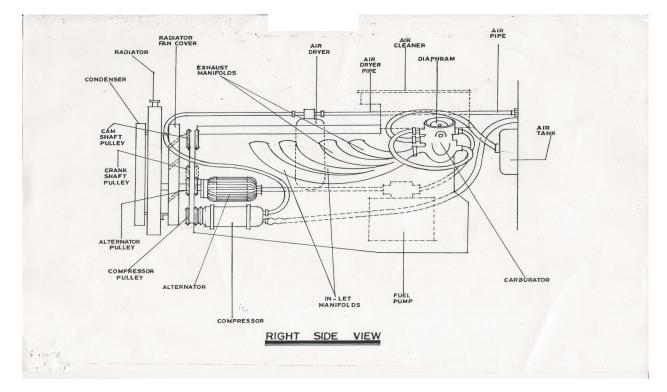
Fuel Economizer Mechanism Using Pressurized Air Pipe without pedal
